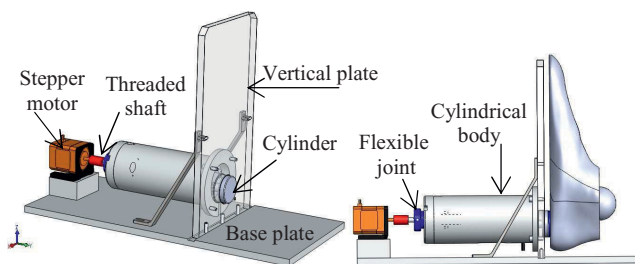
The compression device. The stepper motor is connected to the threaded shaft with a shaft and flexible joint.
